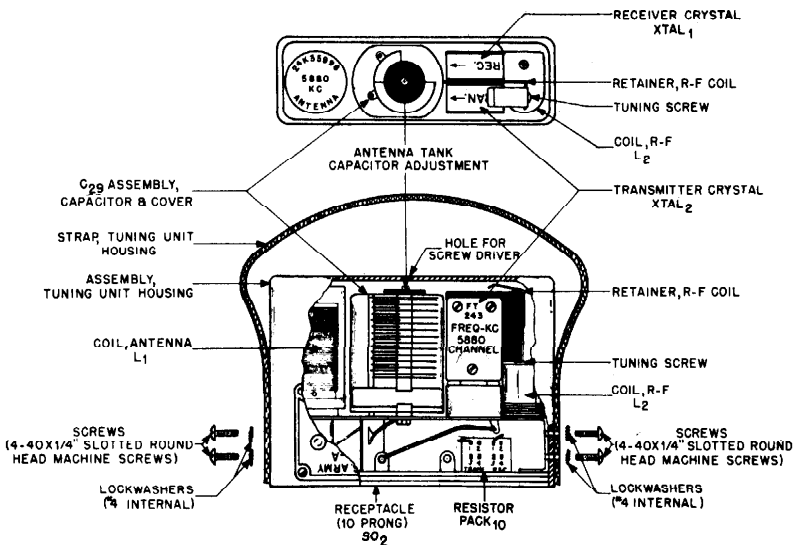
A. Tuning Unit BC-746-(\*), Instruction Detail
